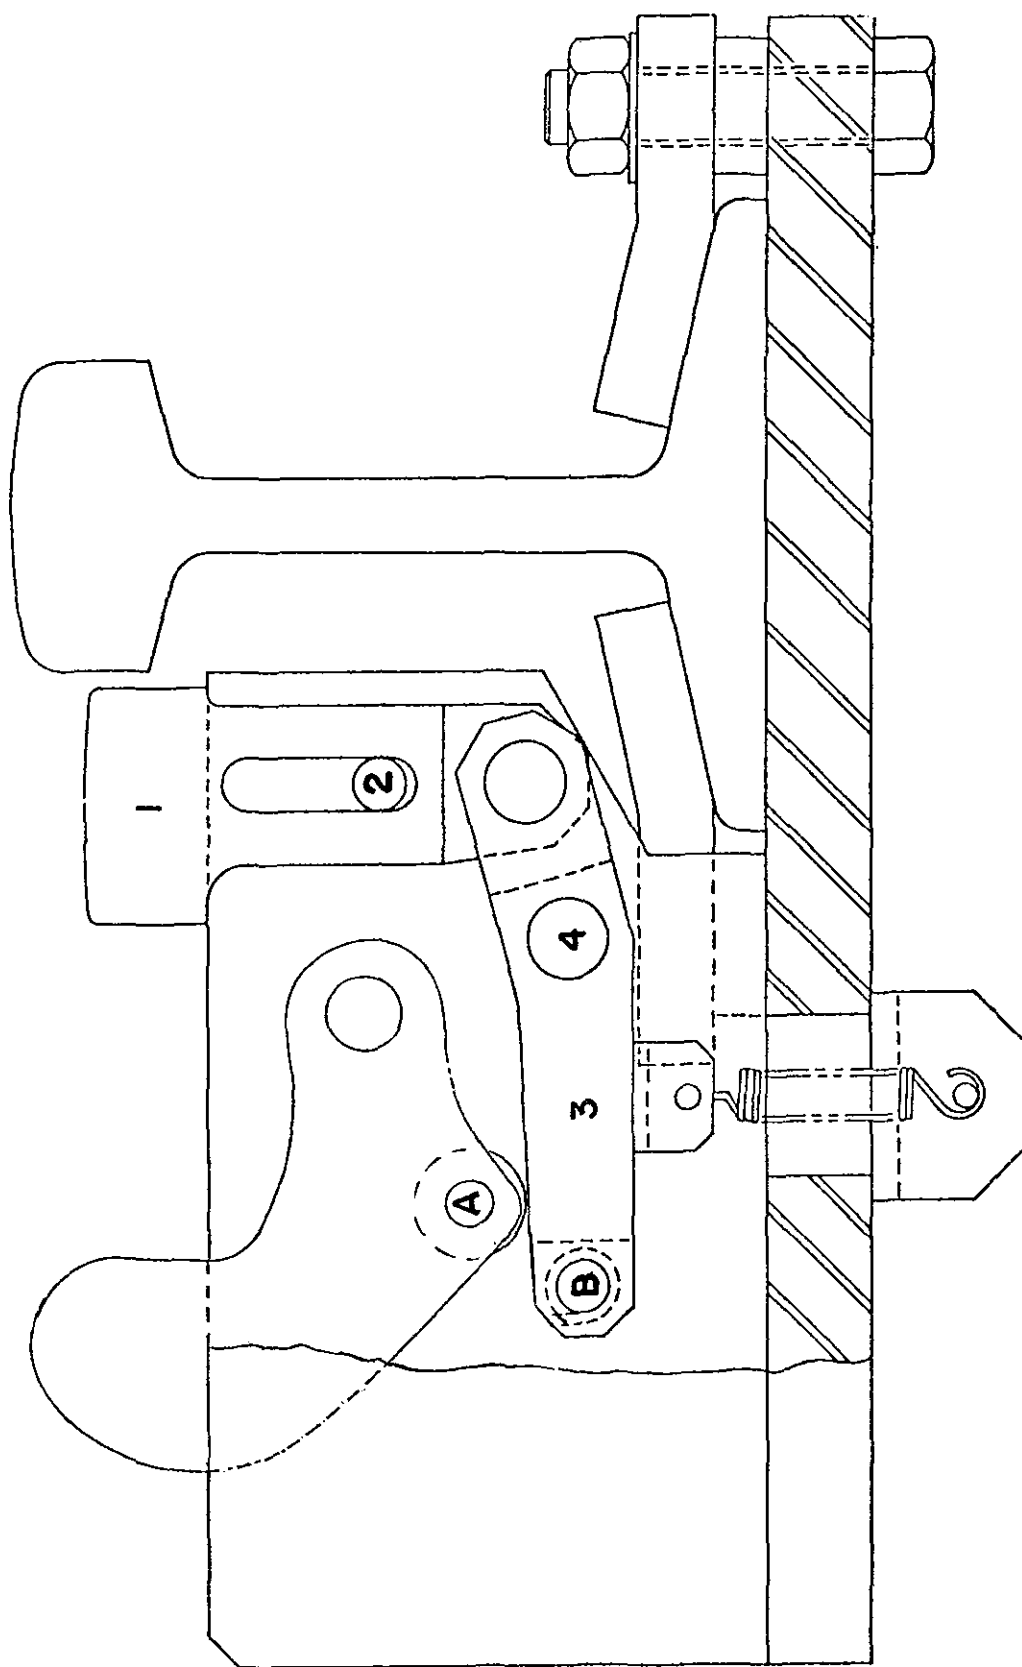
DRAWING OF THE MODIFIED MECHANICAL WHEEL EXCITER
